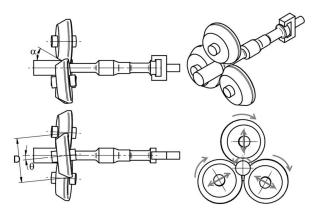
Design of the skew rolling process with three tapered rolls [12] (Reprinted from ref. [12]).
